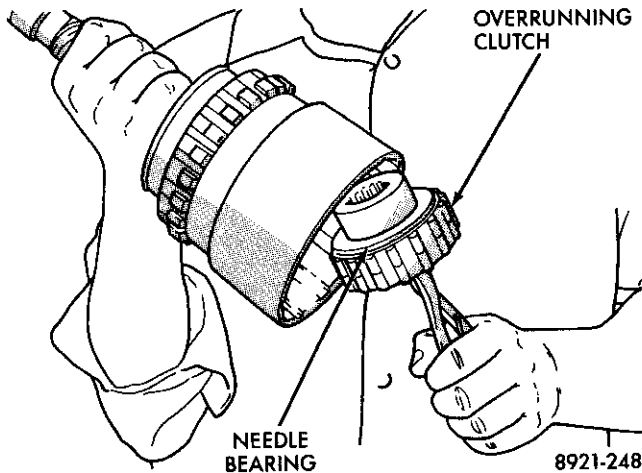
Overrunning Clutch Assembly Removal/ Installation
